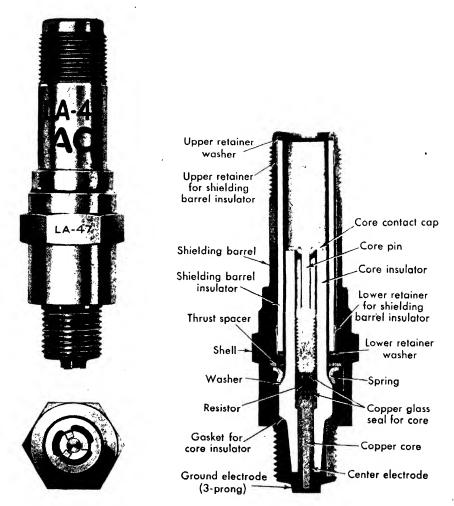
Shielded aircraft engine spark plug having three "shell" electrodes. Two views. (Courtesy AC Spark Plug Division, General Motors Corporation)
